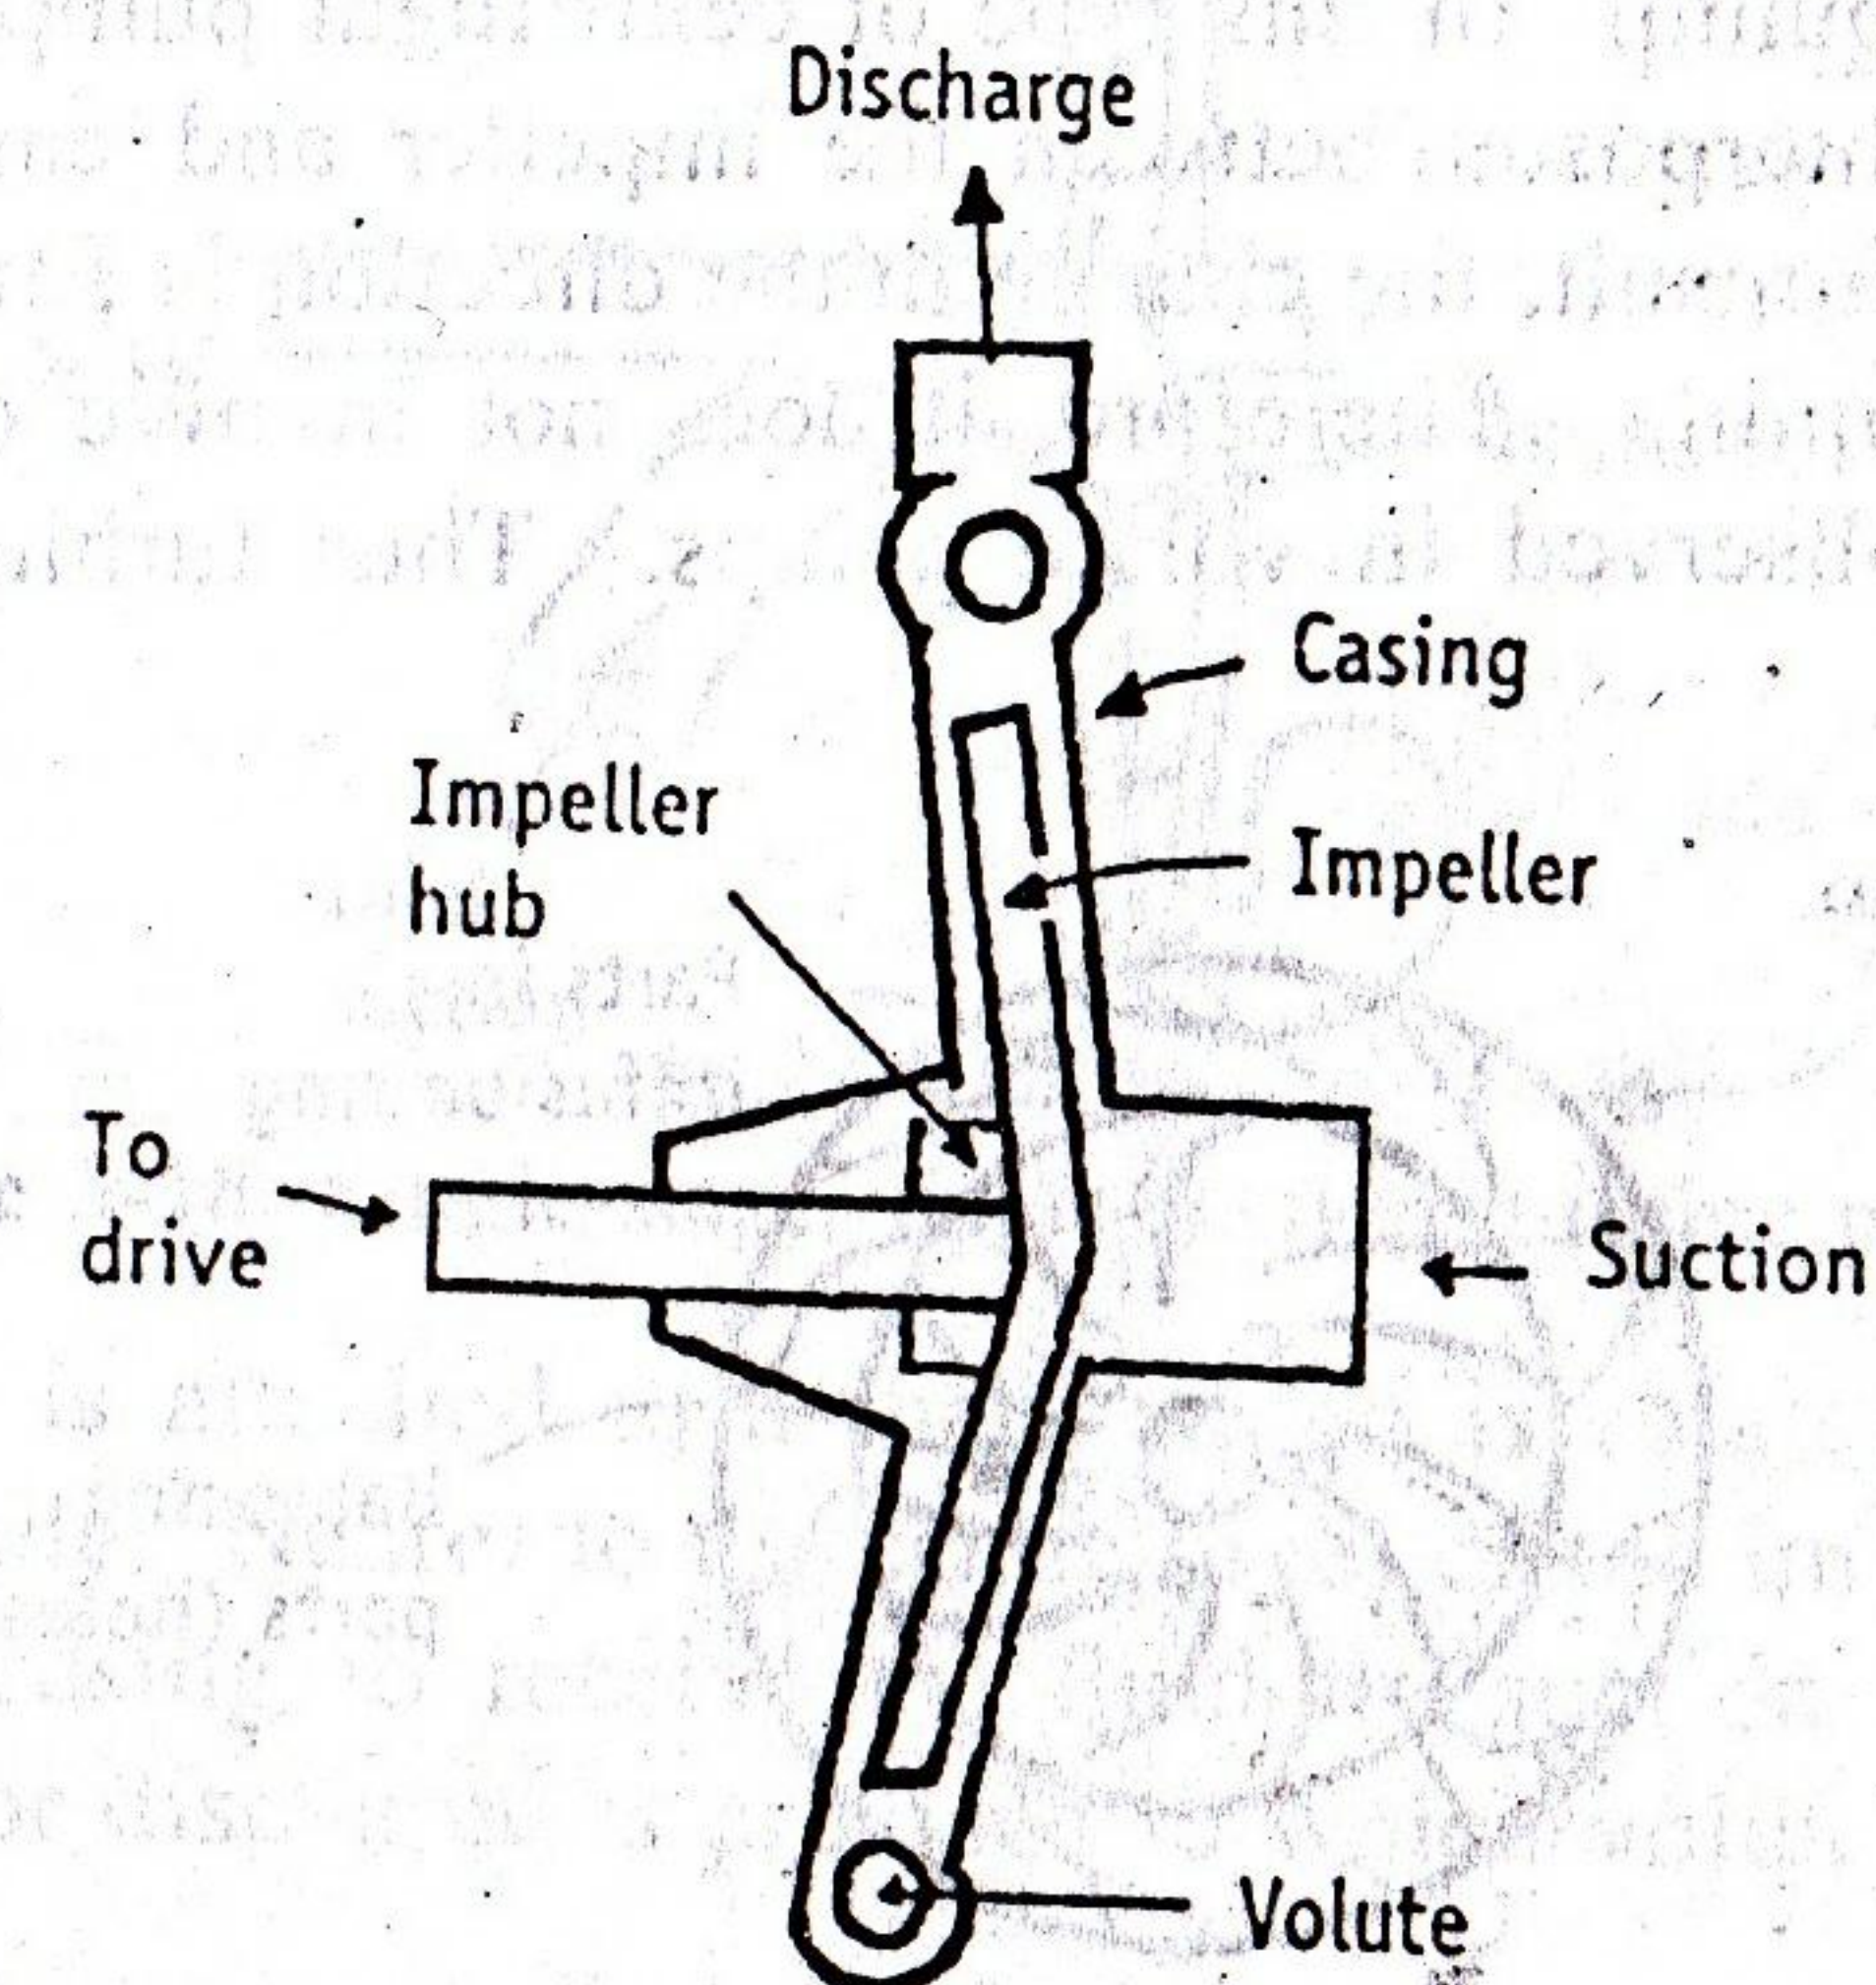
Construction of single-stage, single-suction, open-impeller volute pump.
